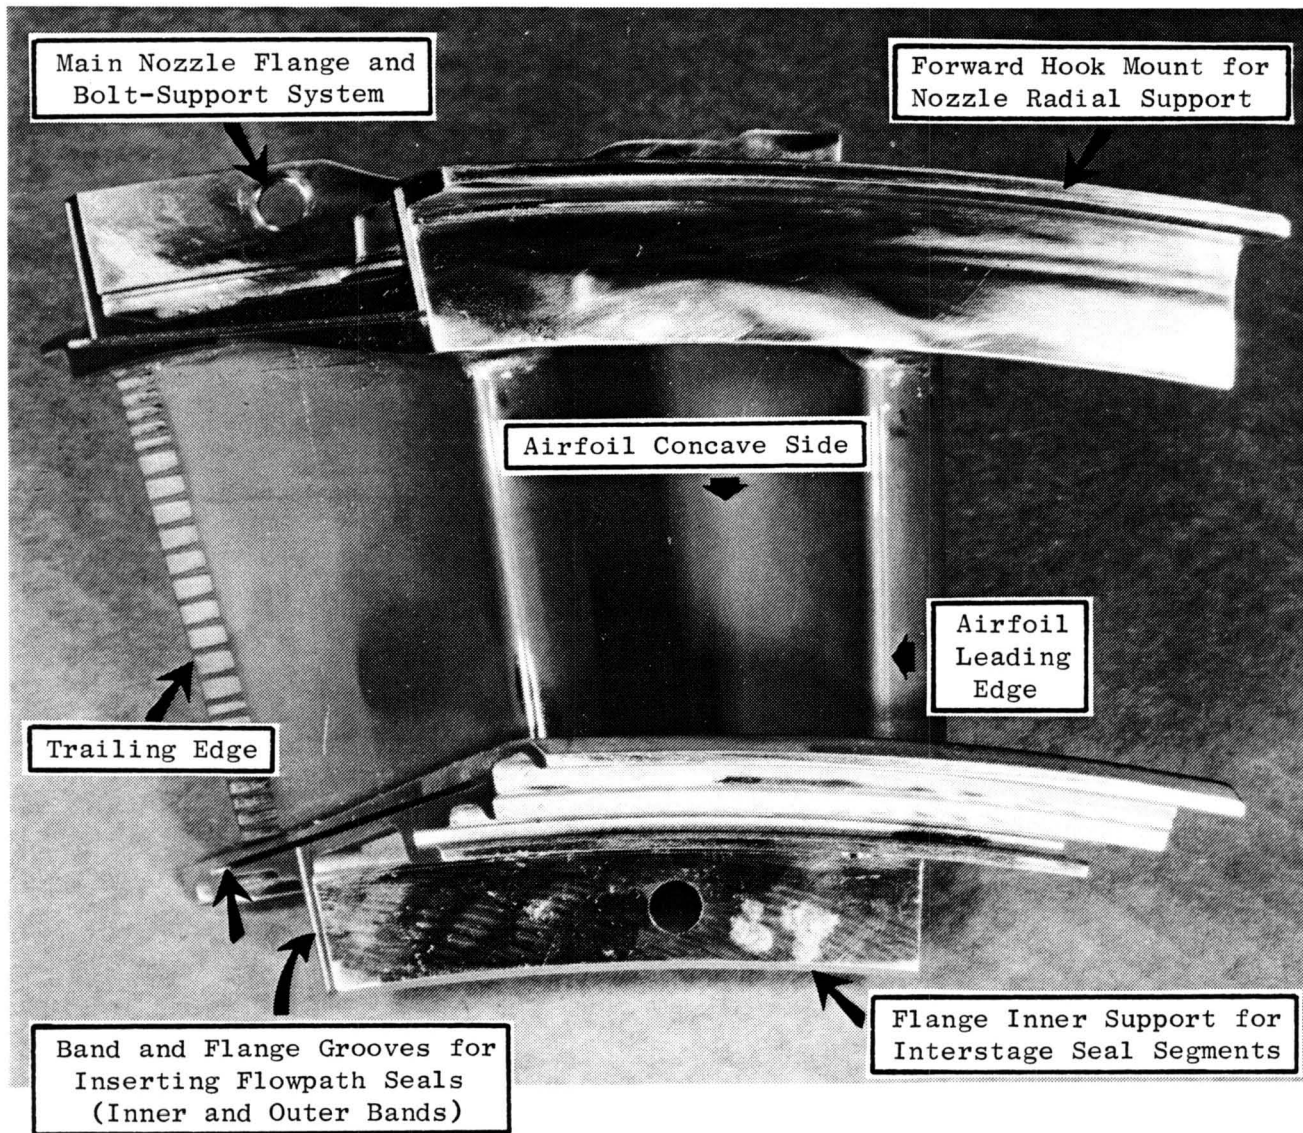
HPT Stage 2 Nozzle Segment after Fabrication and Machining.
